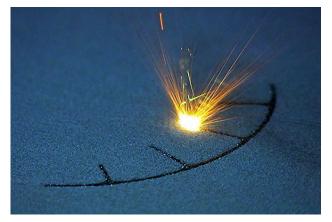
A laser fuses metal powder to form one of many successive layers that will form the final manufactured part. Courtesy of GE Oil & Gas.
